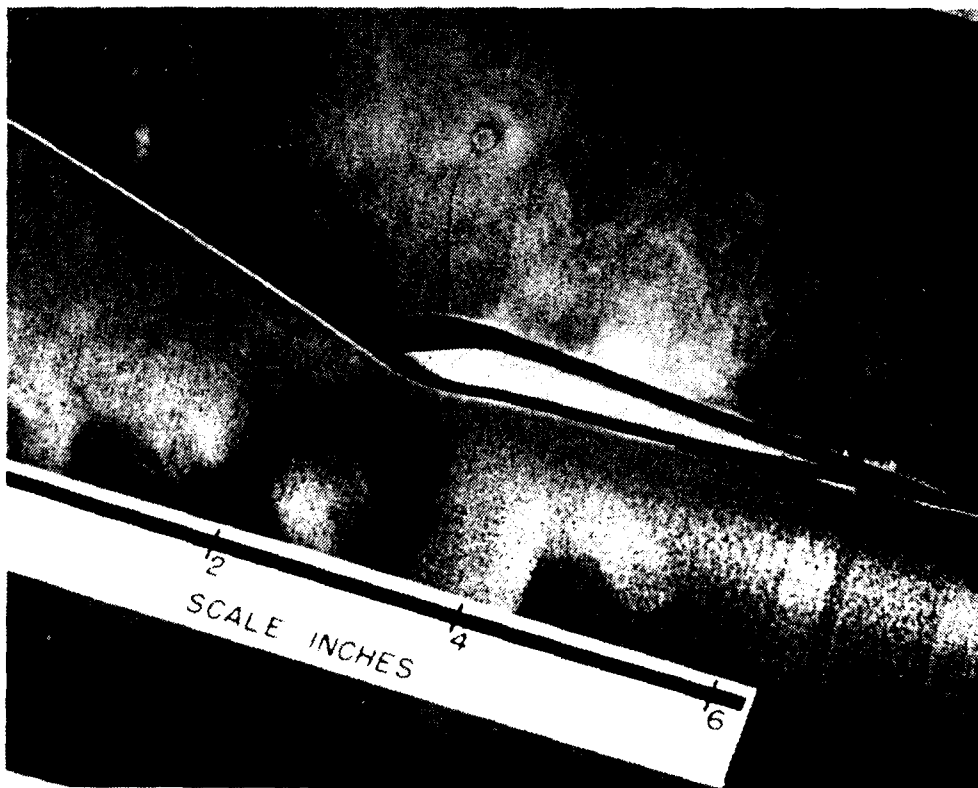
PARTIAL BOTTOM FILLET CRACKS
